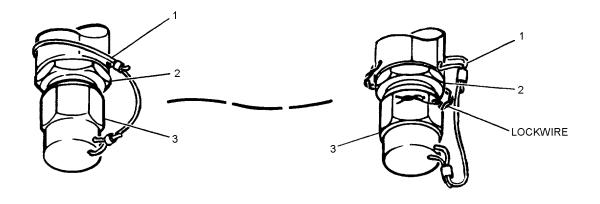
Engine Motive Flow Check Valve Leak Test (Sheet 3)
